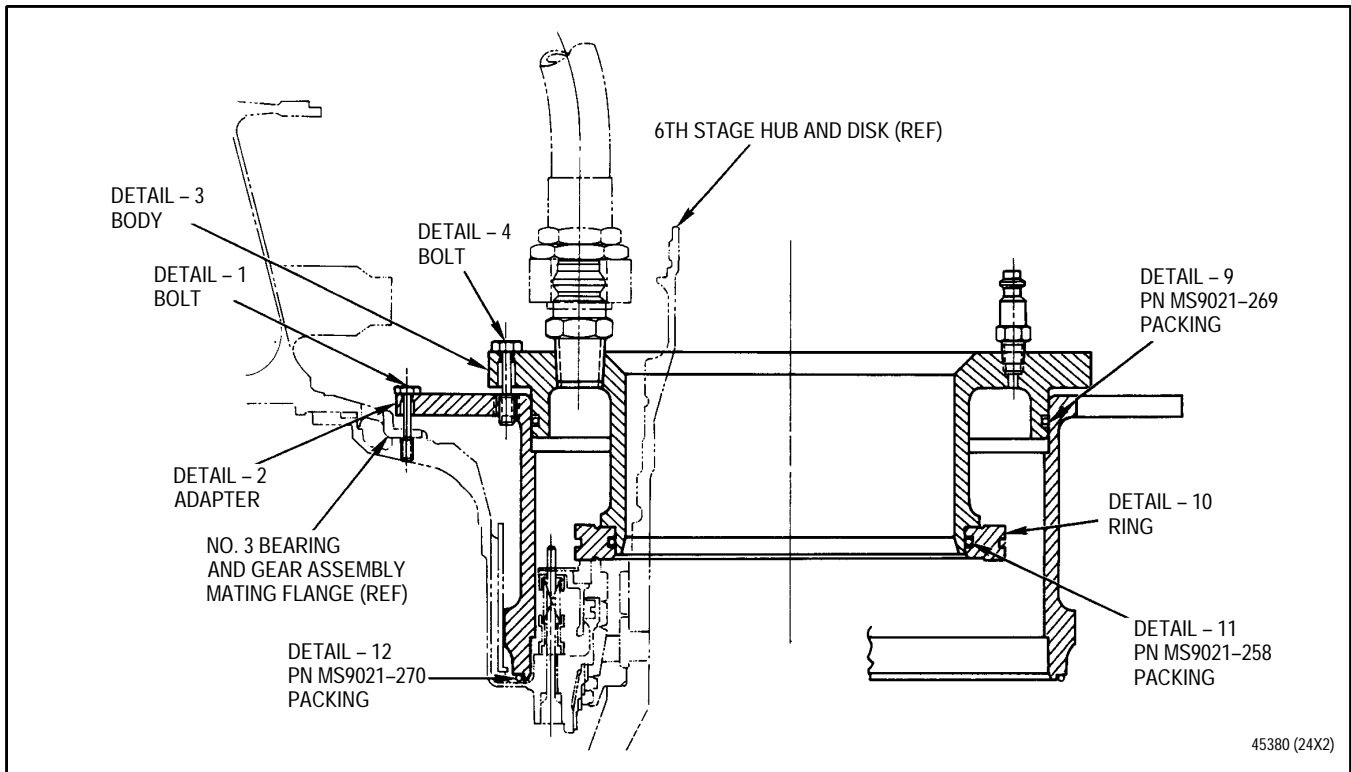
A. No. 3 Bearing Rear Seal Assembly - Air Leakage Check (Sheet 1 of 2)
